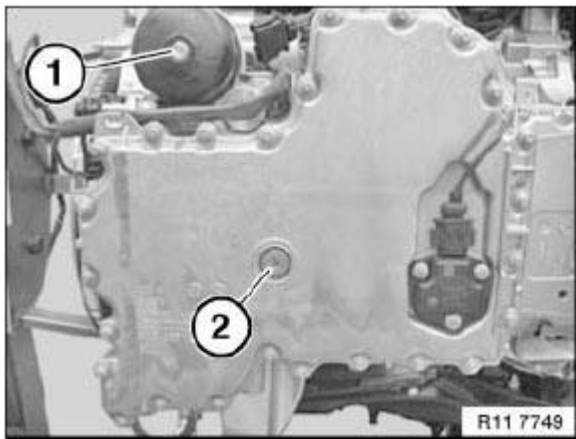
Identifying Oil Sump And Filter Cap Plug
